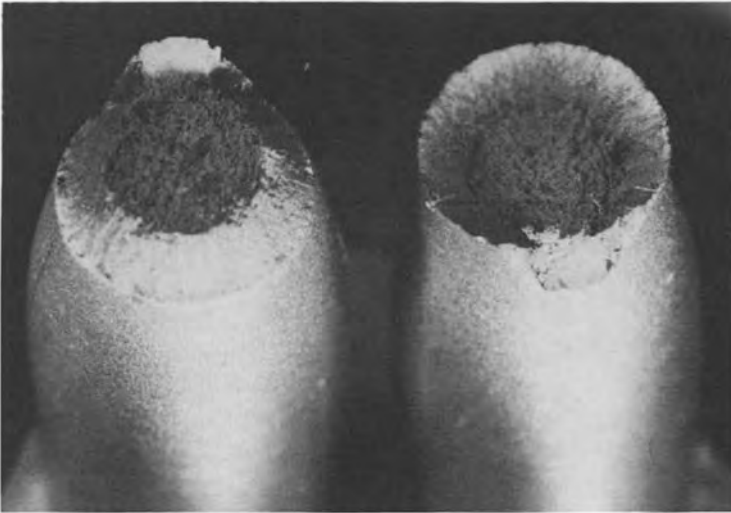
Typical cup-and-cone fracture of a ductile annealed 1035 steel in a cylindrical tensile specimen. This type of fracture originates near the center of the section with multiple cracks that join and spread outward until the 45° shear lip forms at the end of fracture. Photo courtesy of Packer Engineering Associates, Inc.
